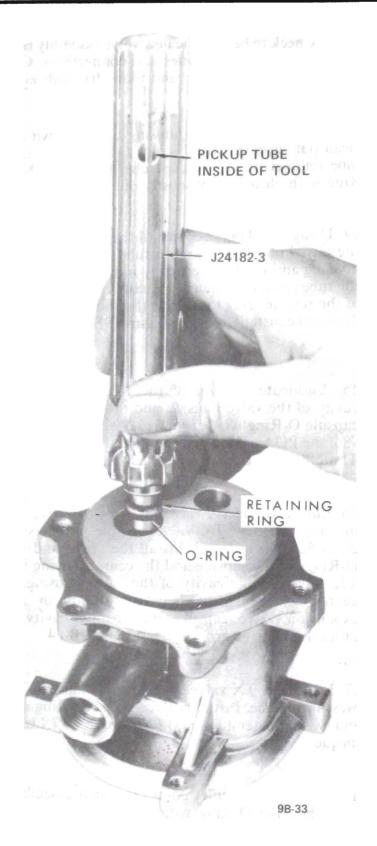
B-37 Installing Pick-Up Tube with Retaining Ring Installing Tool
